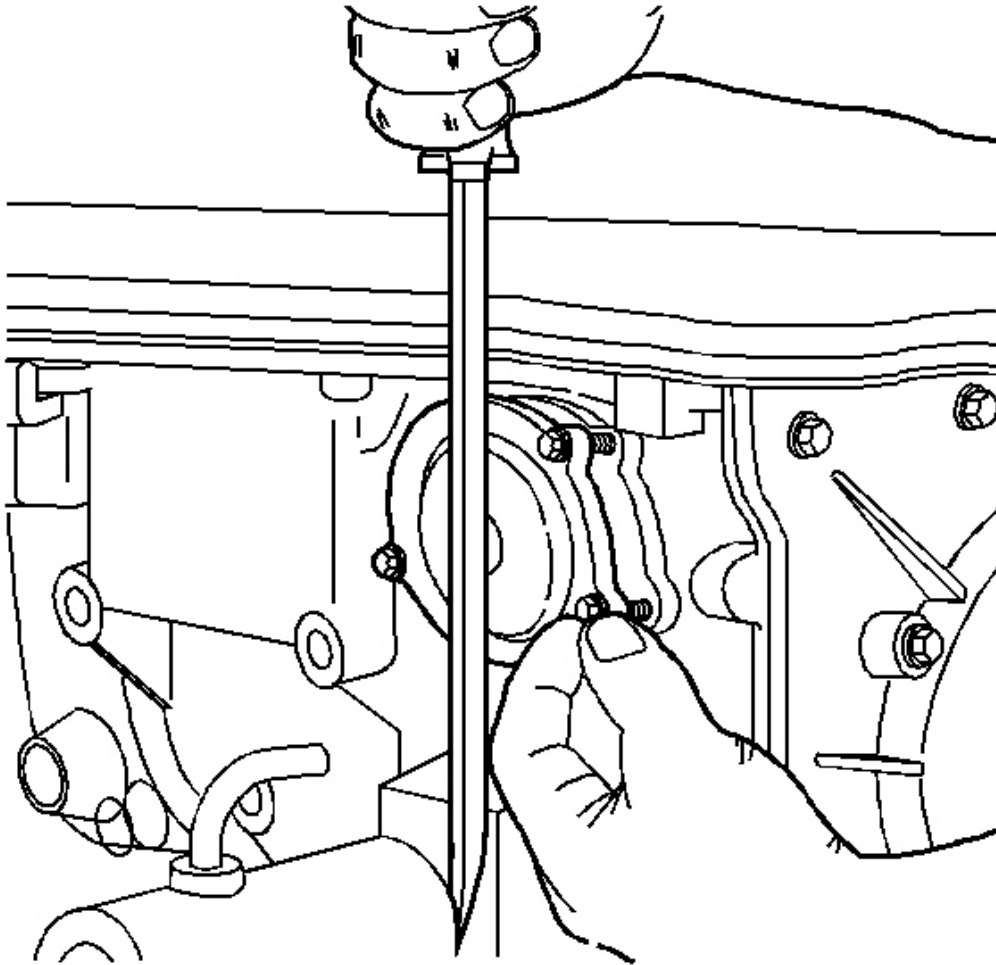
Installing 4th Servo Cover Bolts While Compressing Piston
